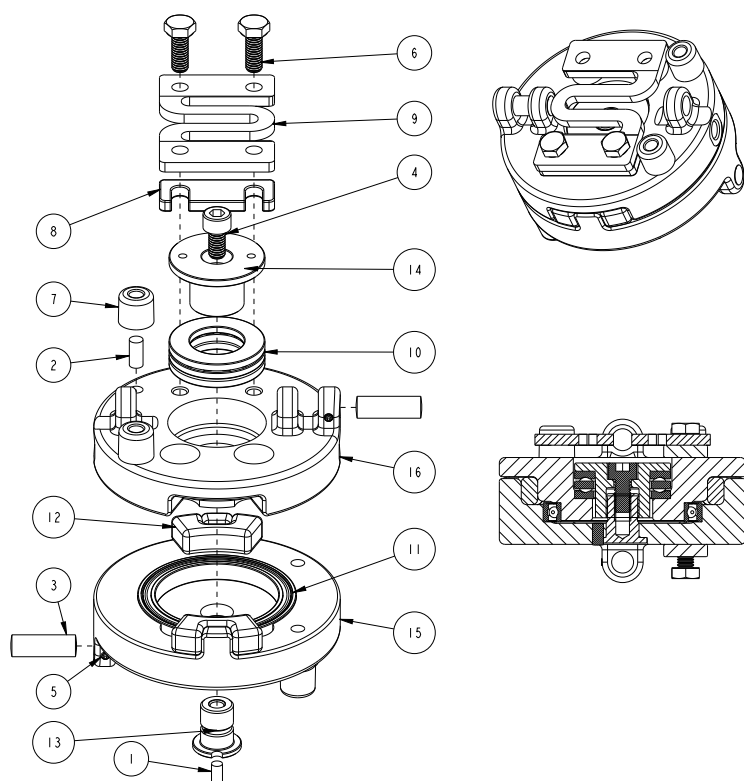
Rotating vertebra assembly; exploded, section and ISO views.
